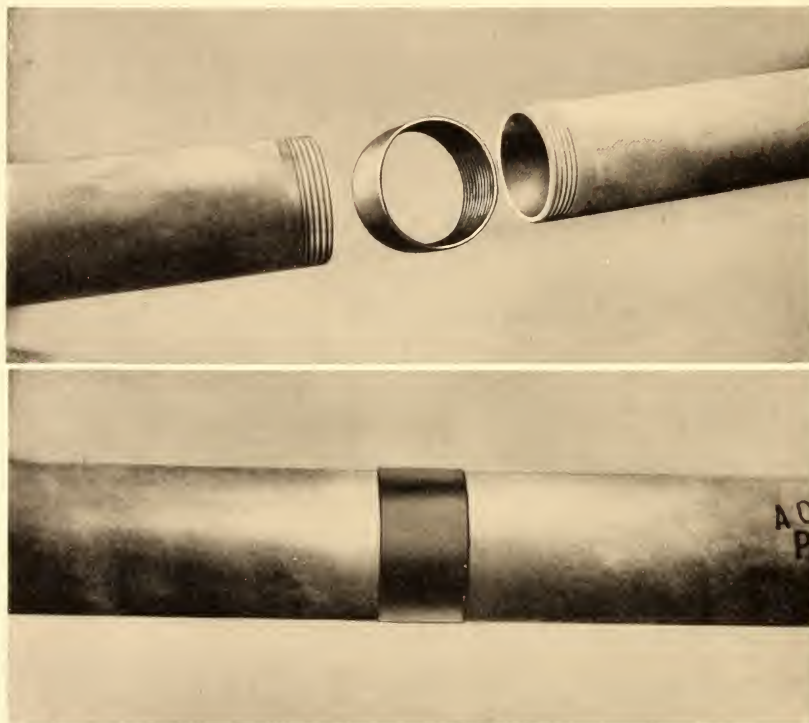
THE SCREWED SLEEVE JOINT BEFORE AND AFTER ASSEMBLY.
